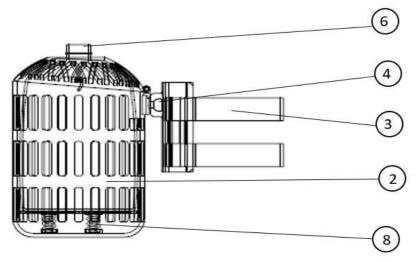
Frontal detail of the wearable modular chest tube carrying apparatus for lower extremities
